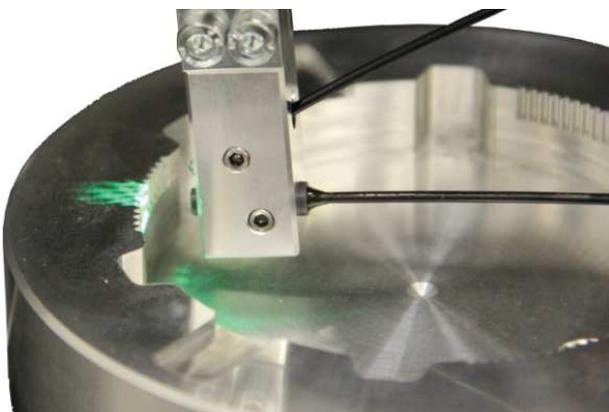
Sensor head of the fiber-optic fringe projection system next to forming tool.
